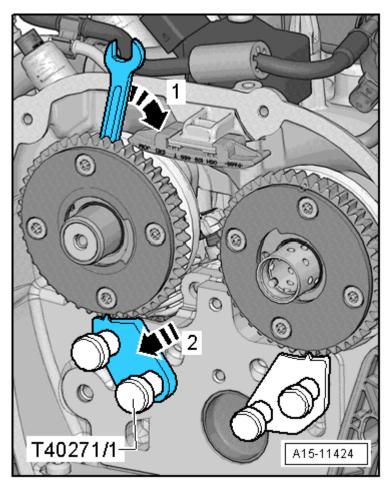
Turn Exhaust Camshaft With A Wrench In Direction Of Arrow
